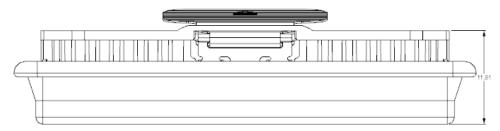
Top View of Free-Side Connector with Dust Cover Attached
